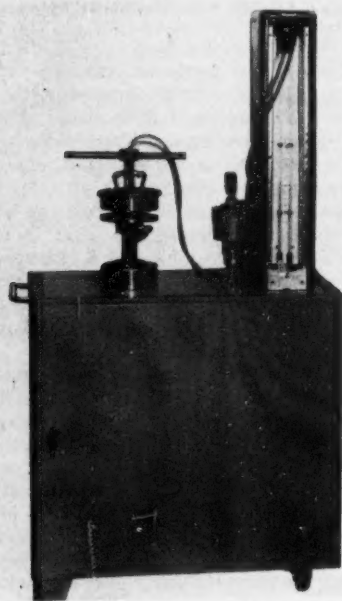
Tolimit Dual-jet Air Plug Gauge for Checking a Liner Bore and a Counterbore in a Cylinder Block
